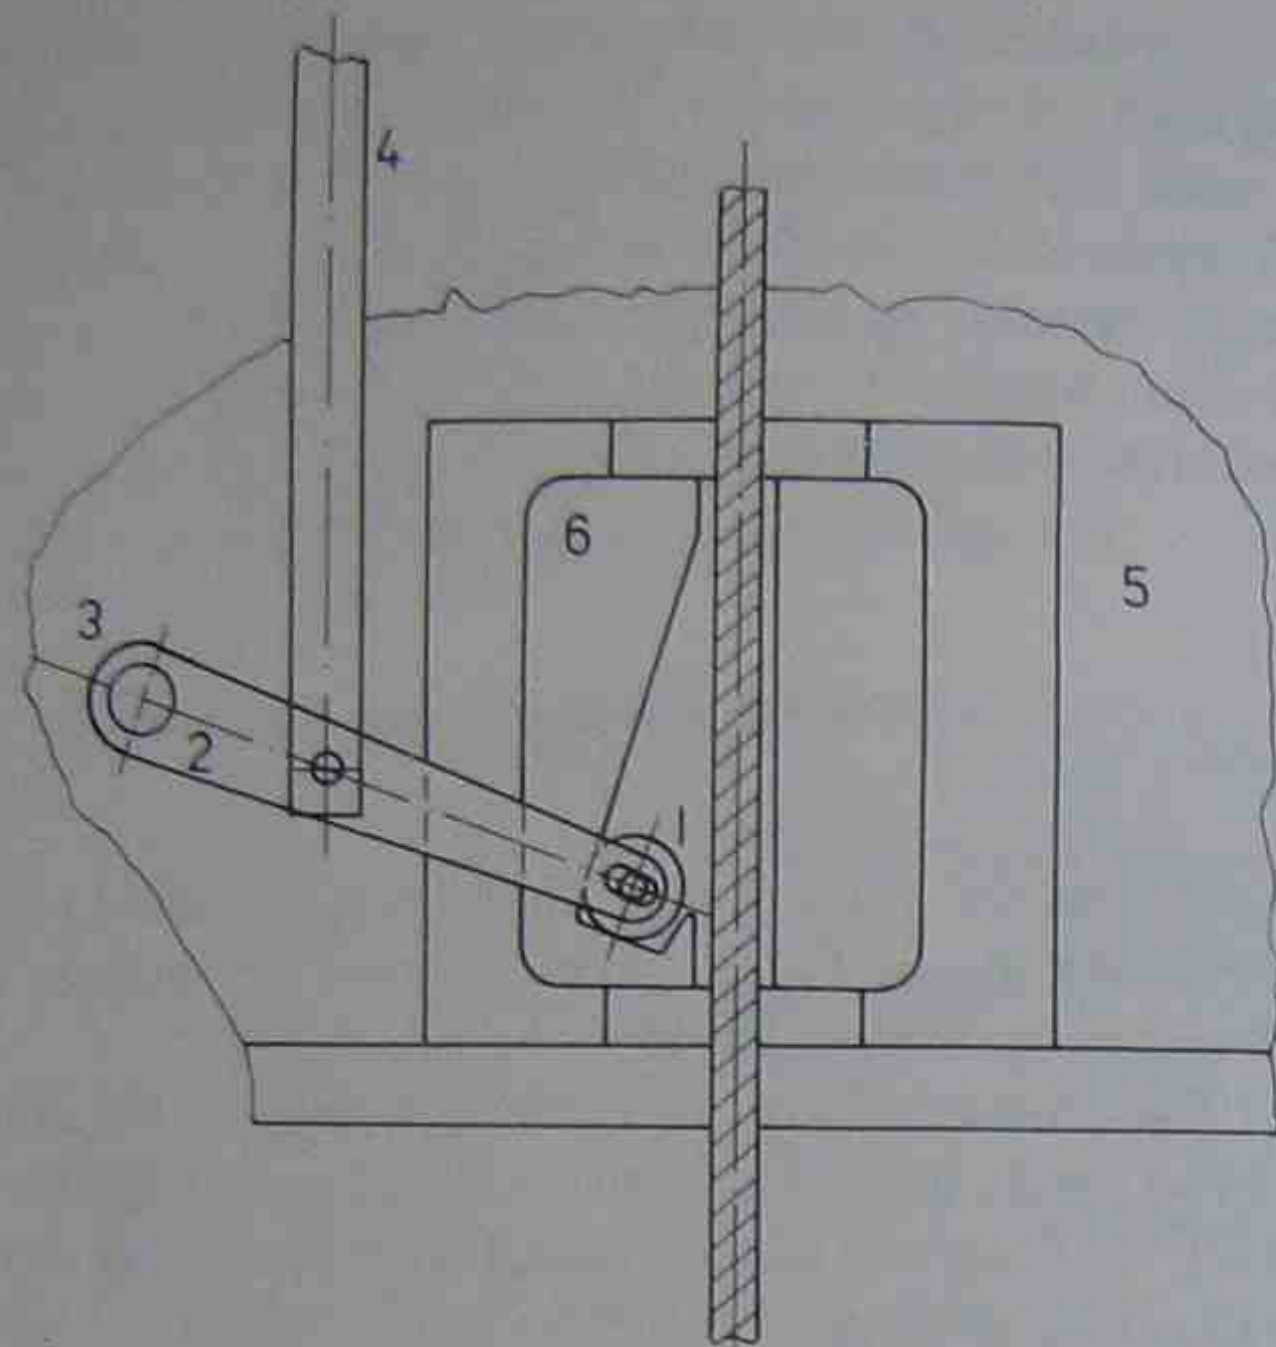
Diagram of roller type safety gear. 1. Roller; 2. Actuating lever; 3. Common shaft; 4. Operating rod; 5. Safety gear block; 6. Jaw.
